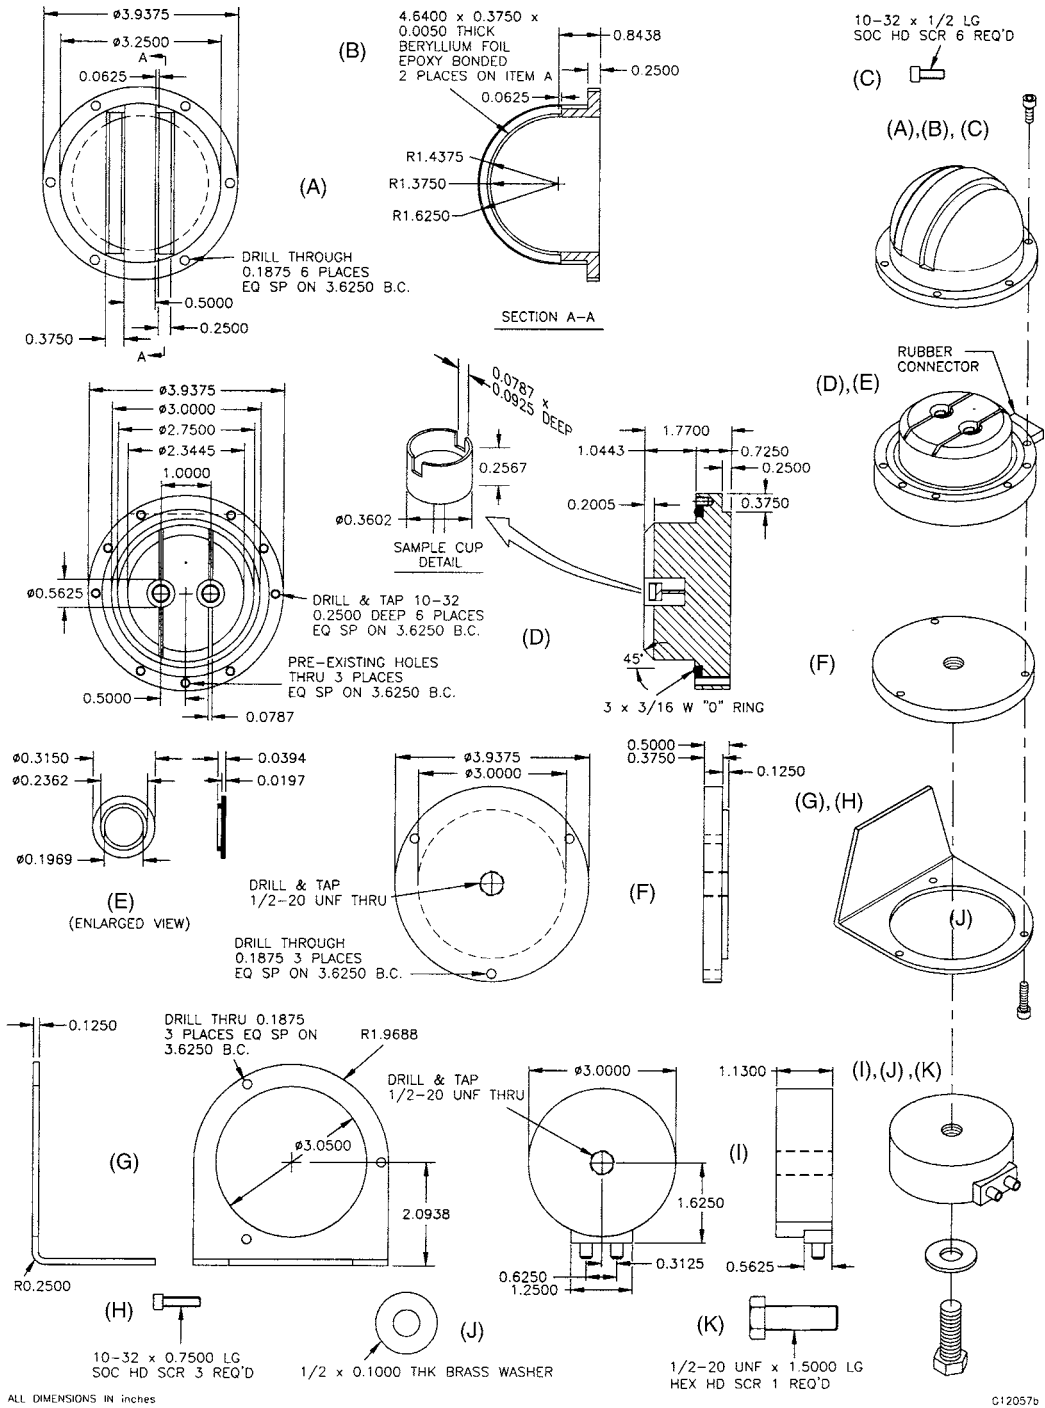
Assembly drawing and sectional views of the DSC/XRD measuring head components.
